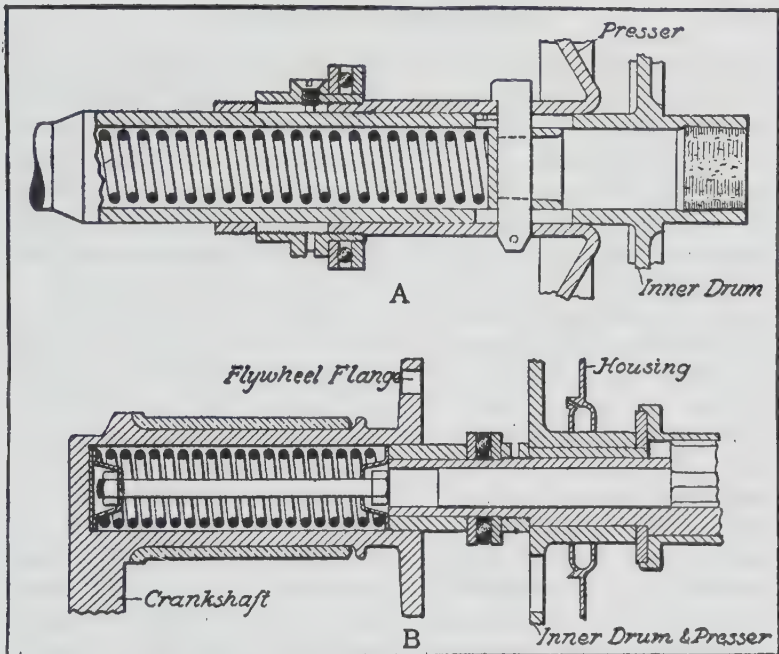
CLUTCH SPRINGS INSIDE SHAFT.
